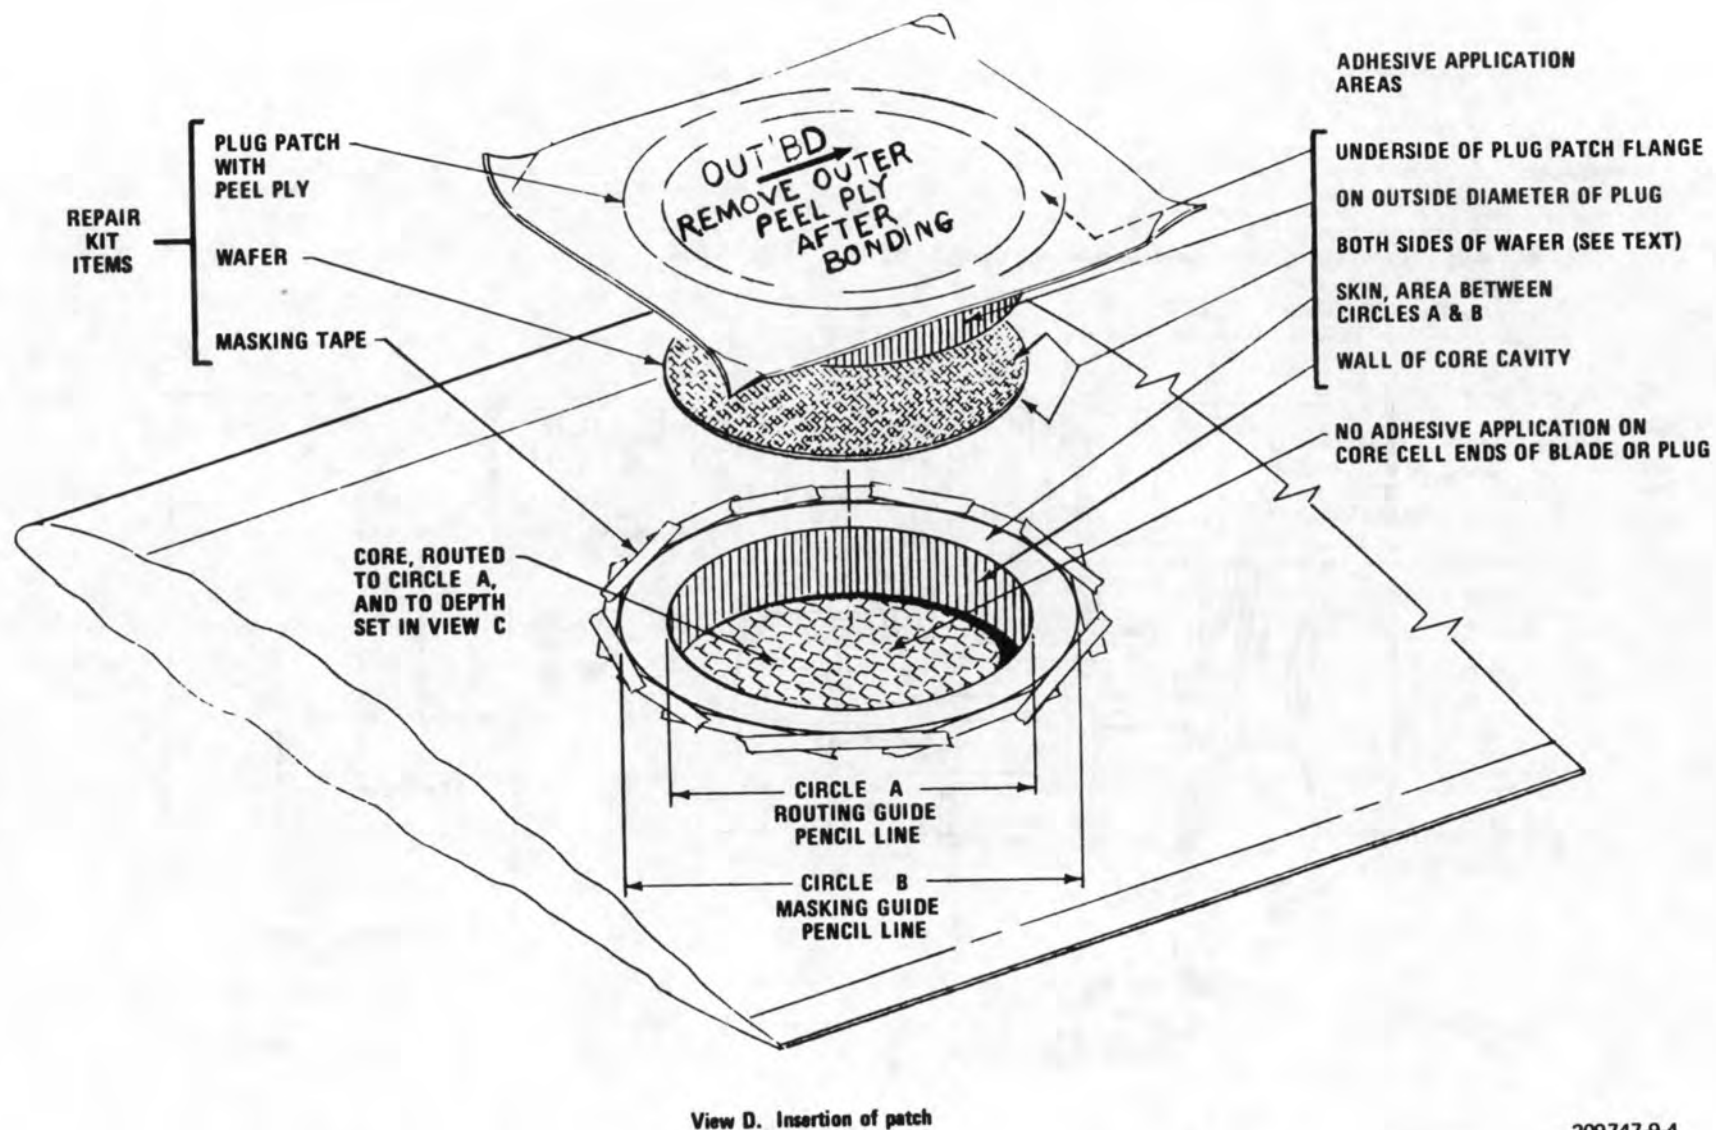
Installation of Plug Patch (K747 Blade) (Sheet 2 of 4)
